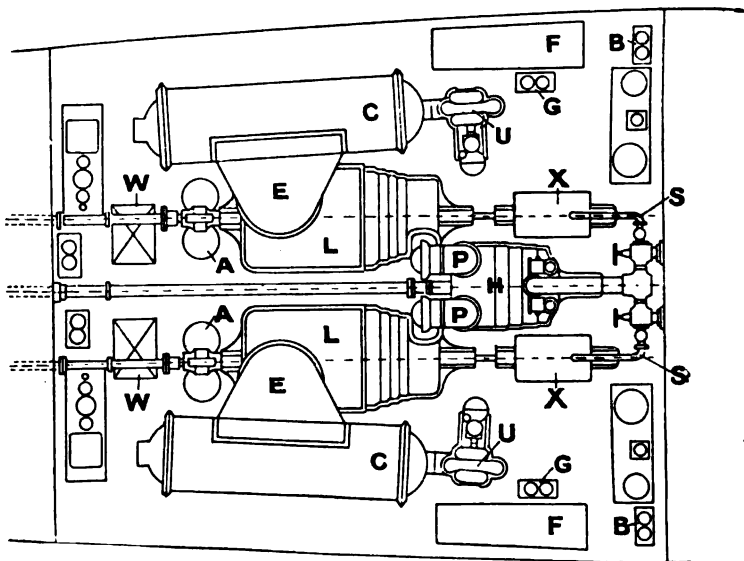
Arrangement of Machinery on Turbine-propelled Vessel.
